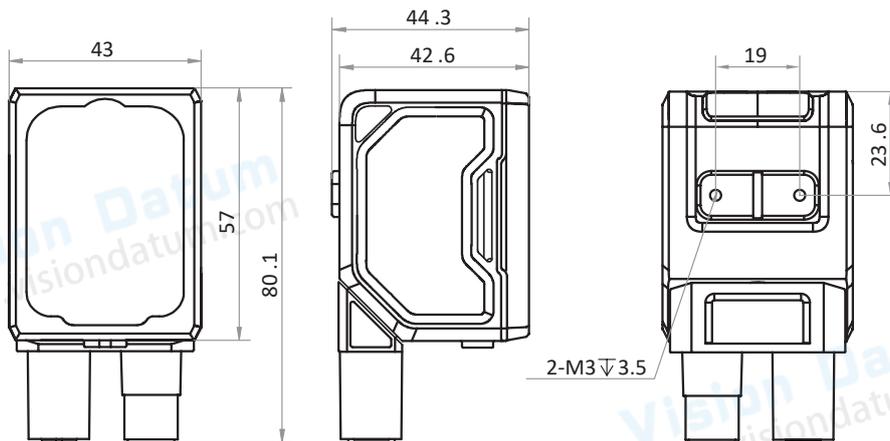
43 × 44.3 × 80.1 mm Mechanical Dimensions (in mm) of the Smart Cameras with M12-Monut housing (The installation uses M3 screws).
